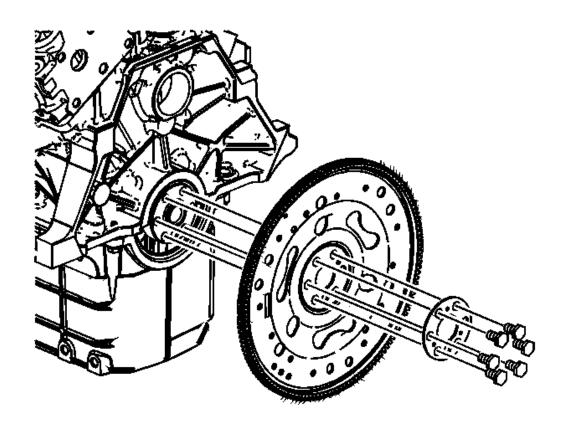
Identifying Flywheel & Bolts (Automatic Transmission) Courtesy of GENERAL MOTORS CORP.
